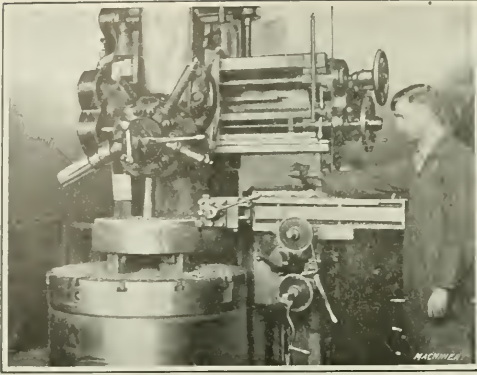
Rough-boring and turning the Outside Diameter of a Locomotive Piston-head
